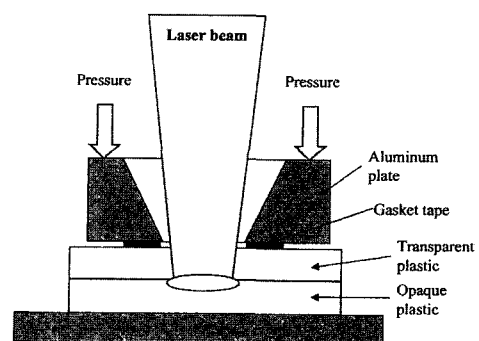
Principle of laser welding of plastics<sup>13)</sup>
